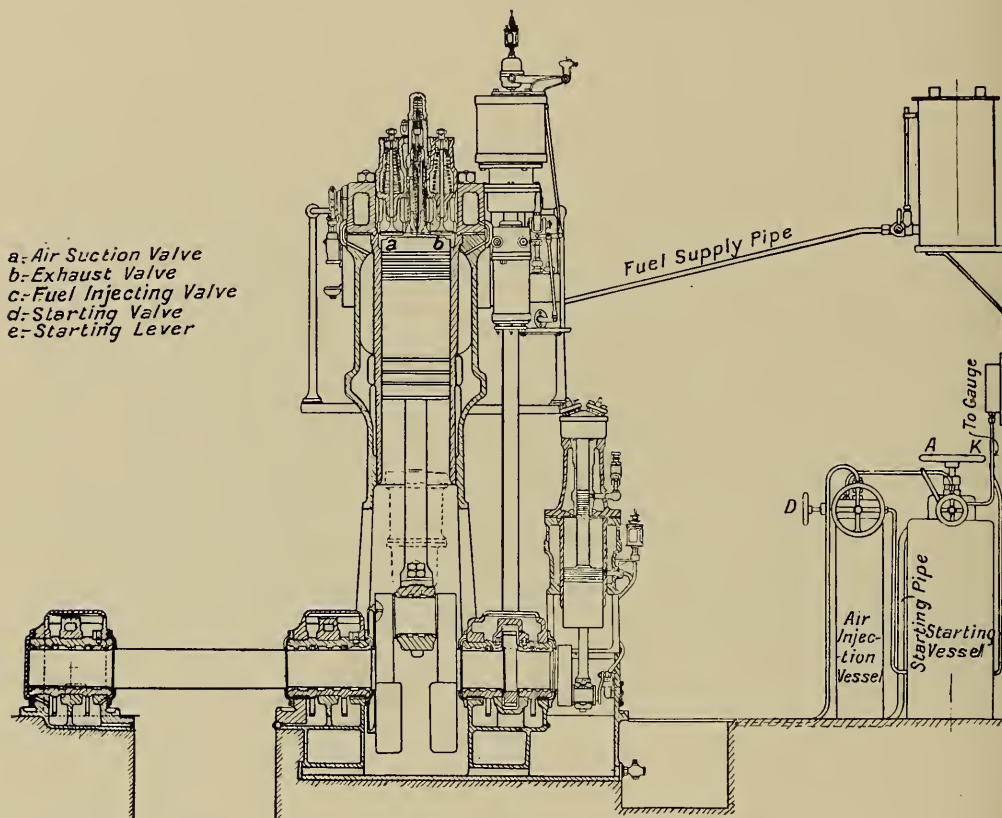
Sectional view of Diesel Oil Engine (Mirreles, Watson & Co.), Note position of inlet valves. See also Fig. 70A.
